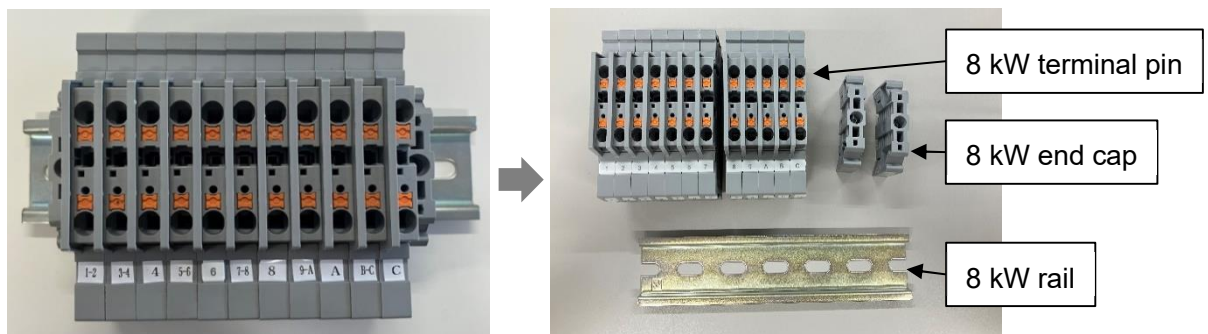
Removal of UV lamp terminal block and end caps from 8 kW terminal block
